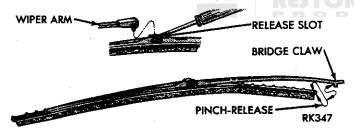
Removing Blade and Wiping Element from Blade Assembly Type"A"
